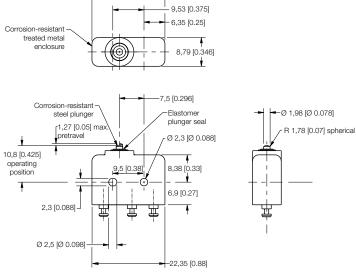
MICRO SWITCH™ XE Dimensions, Wire Lead
